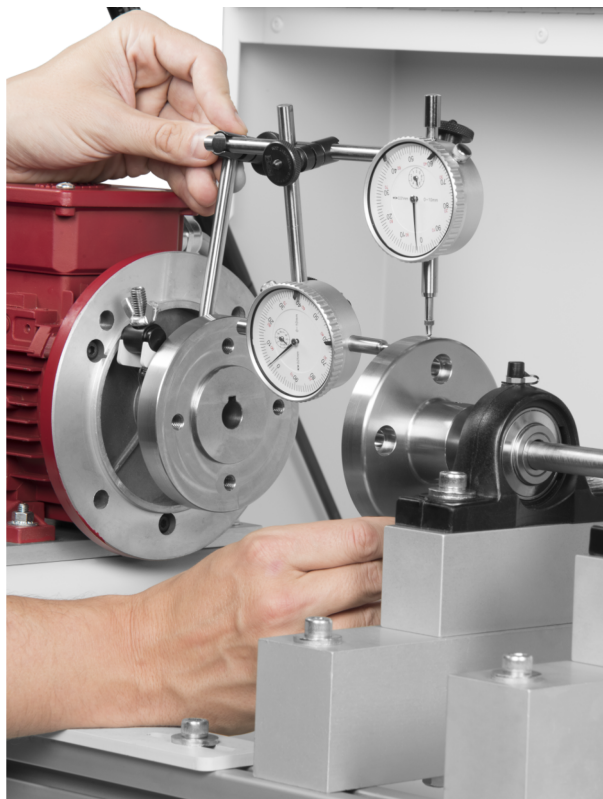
Dial indicator assembly at its initial position for vertical misalignment measurement.
